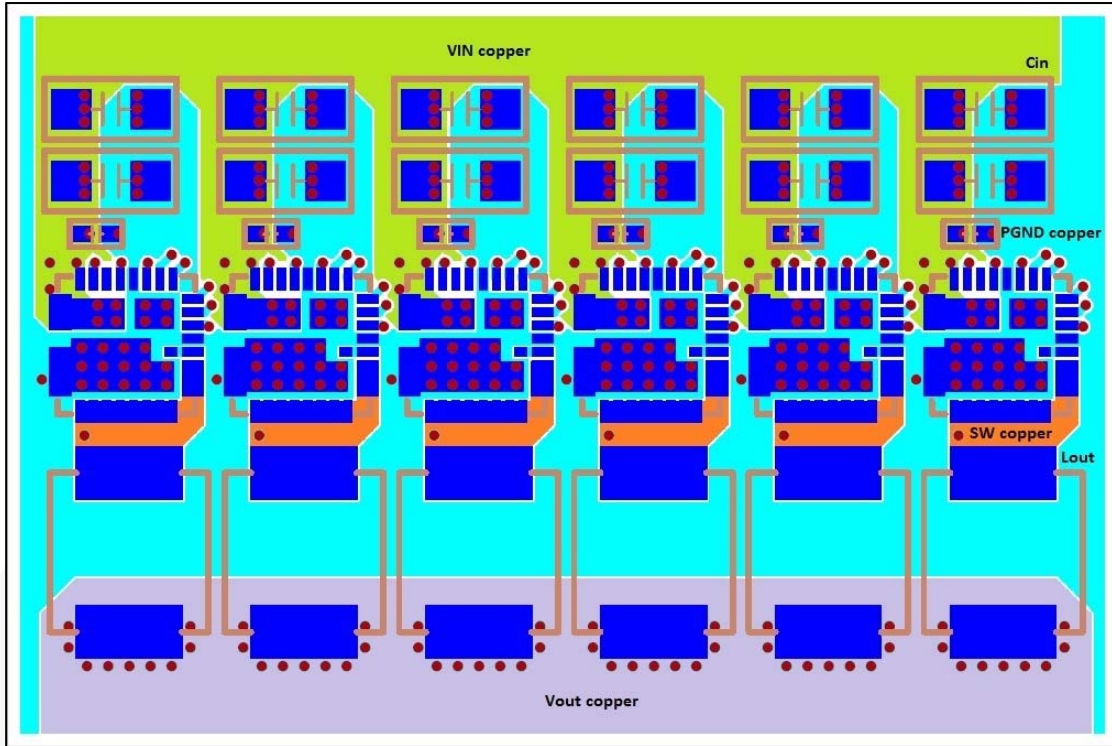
6-Phase Board Layout Example with 6 mm x 6 mm Inductor – Top View
